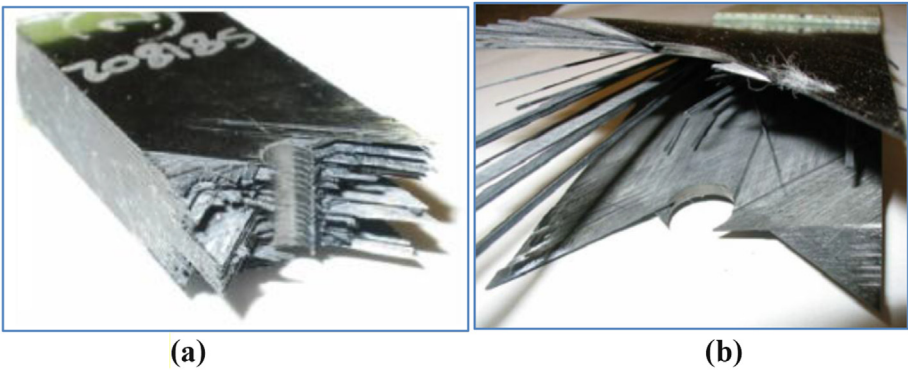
Examples of pullout failure: (a), and delamination failure: (b) from Ref. [5].
